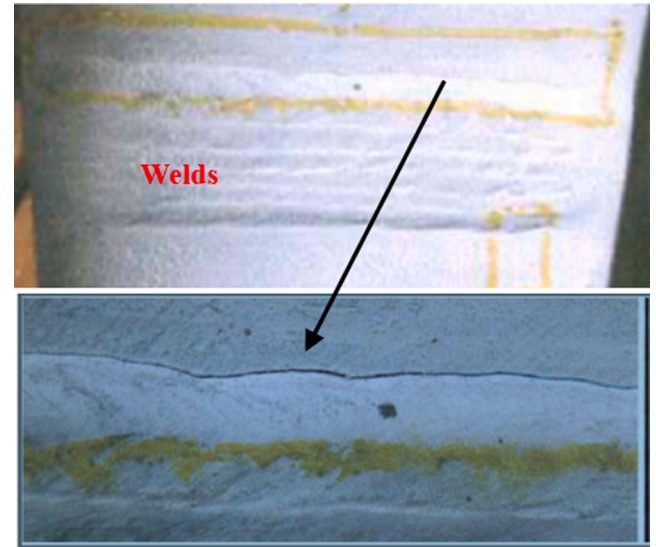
Positions of initiated fatigue crack of butt-welded joints [19].
